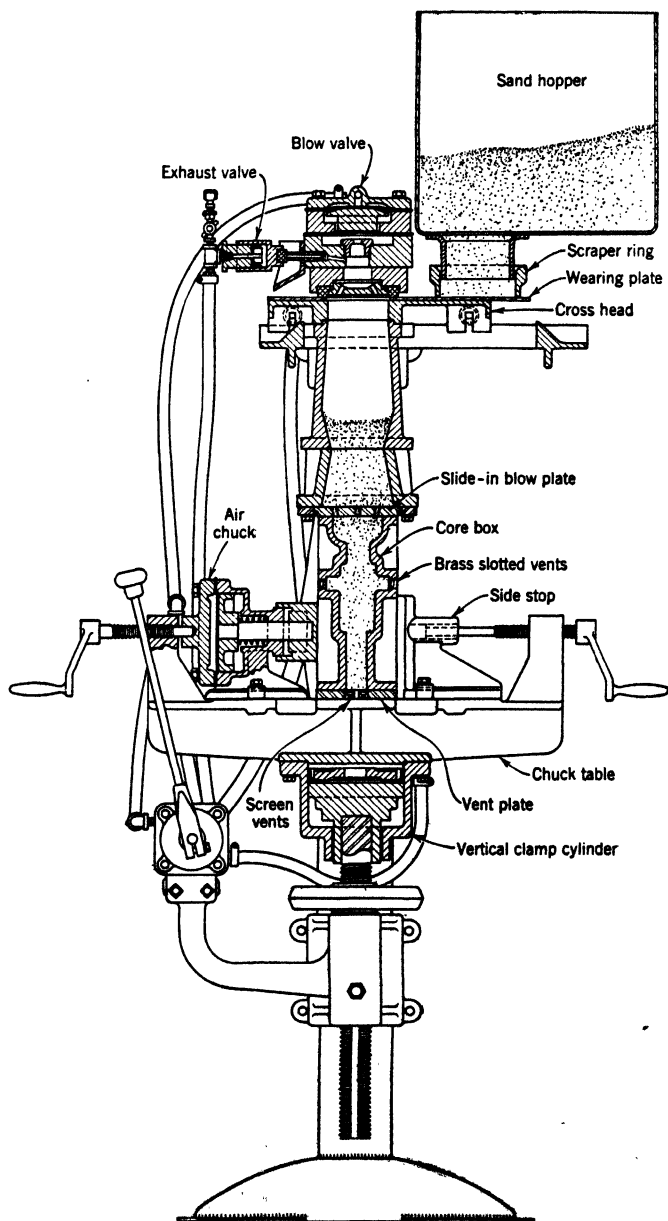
B. Core blower. Front view. (Courtesy of Wm. Demmler & Bros., Kewanee, Ill.)
